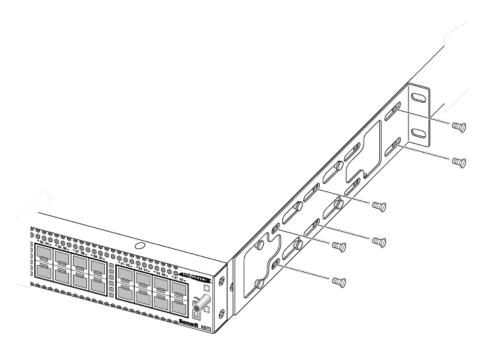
Mid-Mount: Attaching a Long Mounting Bracket
